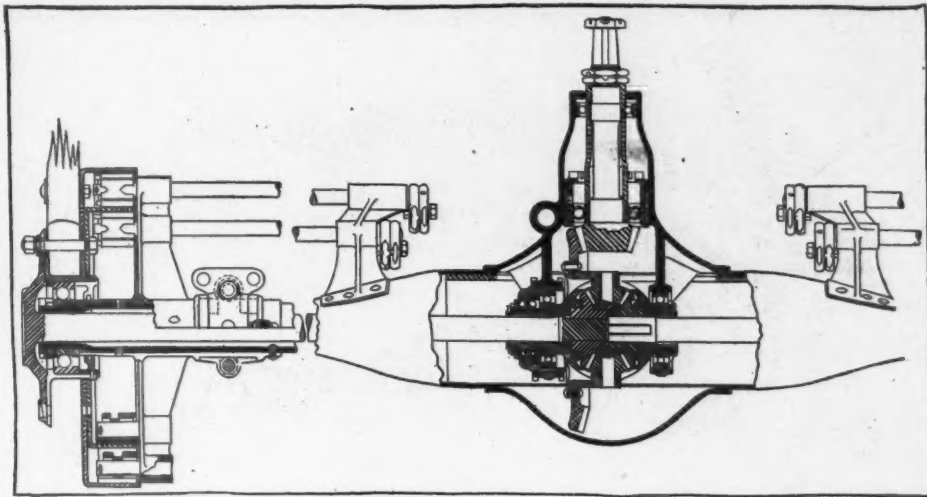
NEW FLOATING AXLE OF SALISBURY WHEEL AND MFG. CO.
